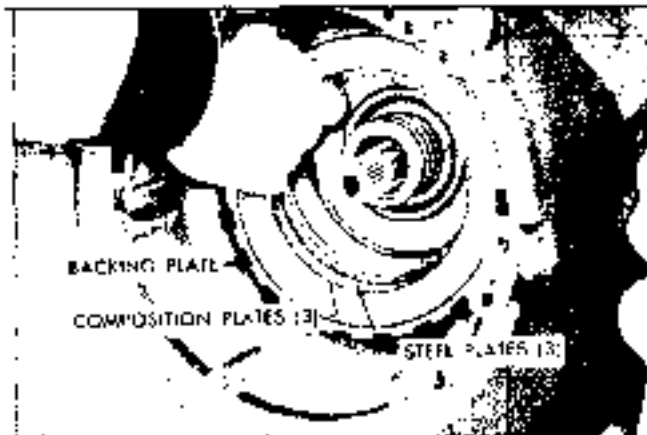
E-146 Installing Intermediate Backing Plate and Clutch Plates
